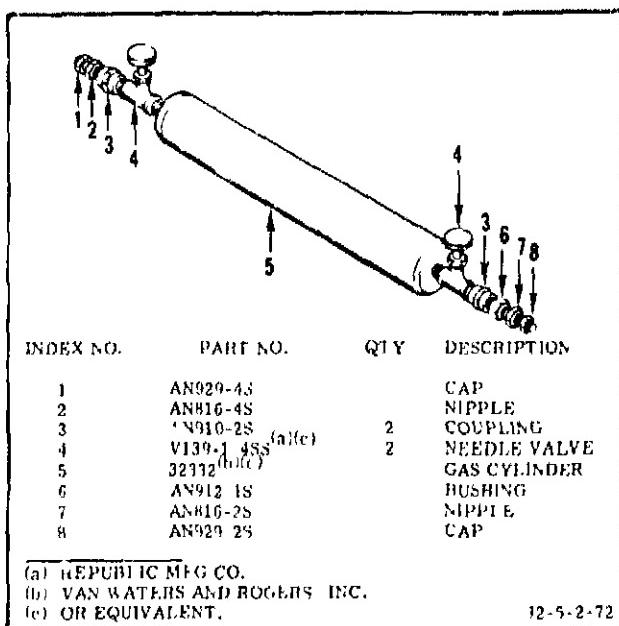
Spark Igniter Cable Gas Sample Bottle RL681000
